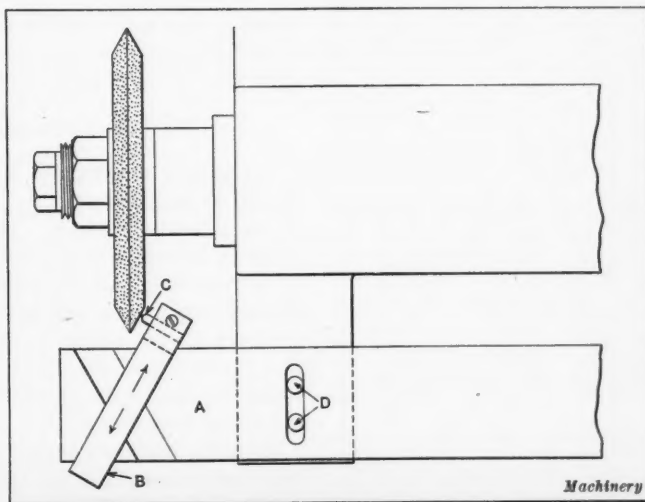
Fixture for dressing Sides of Wheel to Angle of Gage Thread
